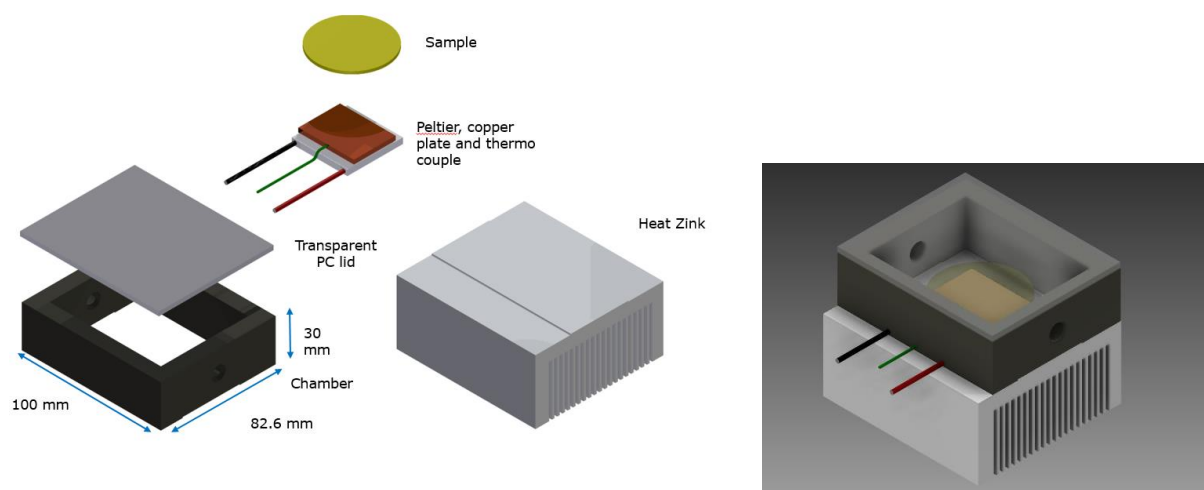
CAD drawing of the individual parts of the environmental chamber and the assembled chamber.
